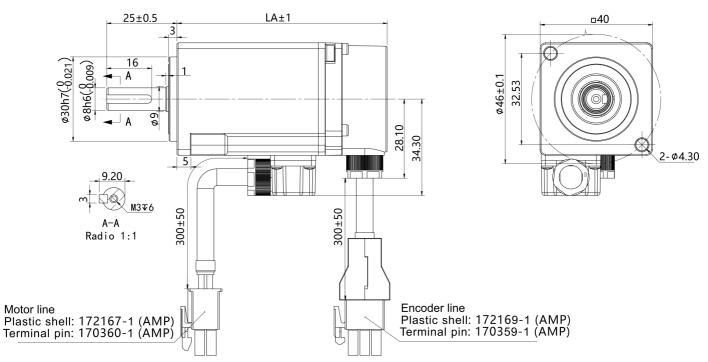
Installation dimension of WD series 40 flange servo motor
